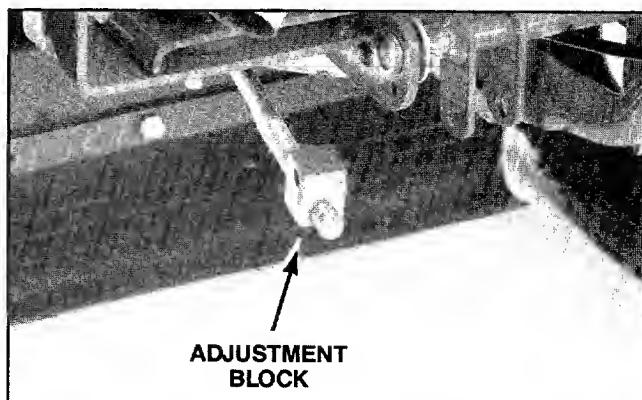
Thread adjustment block clockwise to reduce roller clearance, or counterclockwise to increase clearance.
